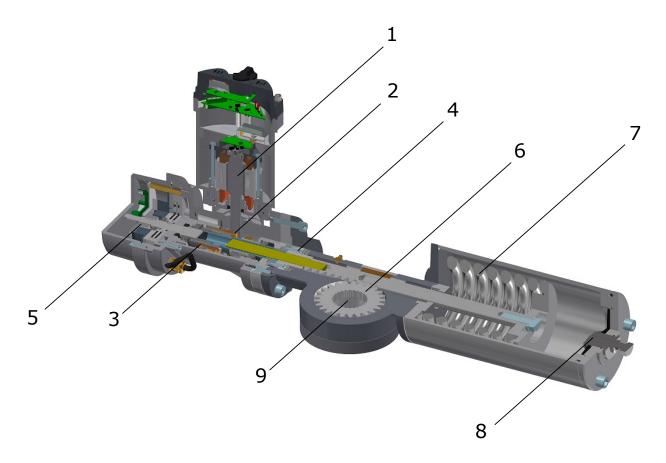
1... Motor, 2... Worm gear stage, 3... Planetary gear train, 4... Ball screw, 5... Operating current brake, 6... Rack-and-pinion gear, 7... Spring, 8... End stop, 9... Fitting shaft
